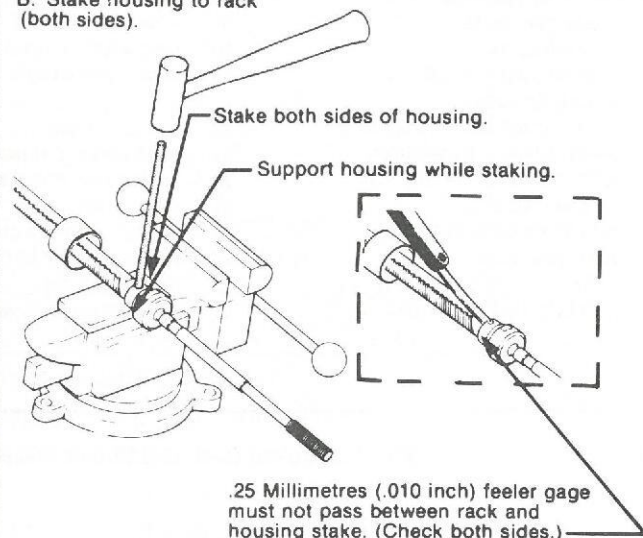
Remove and Install Outer Tie Rod - Replaces Page 3B2-10
